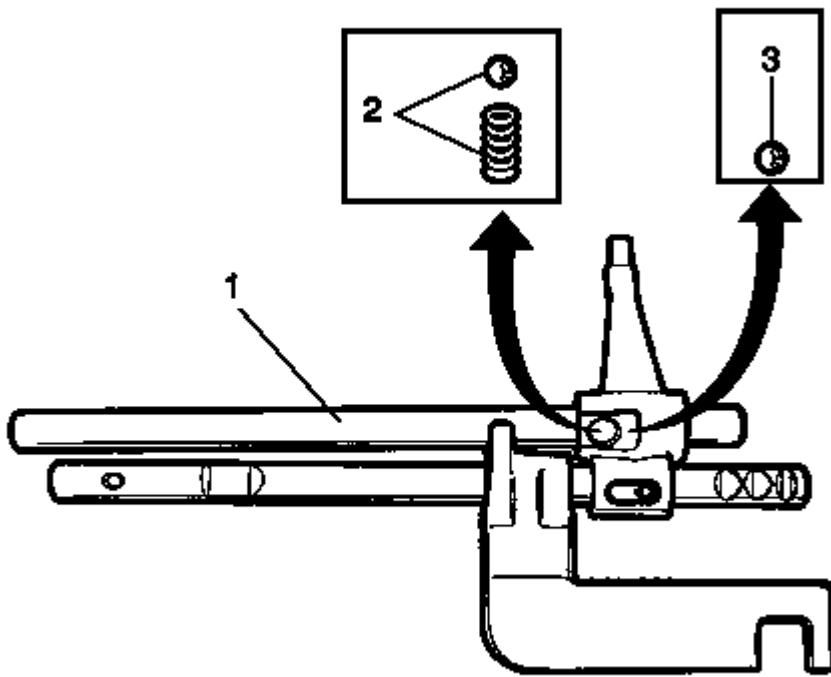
5th-Reverse Gear Ball And Reverse Shift Guide Ball
